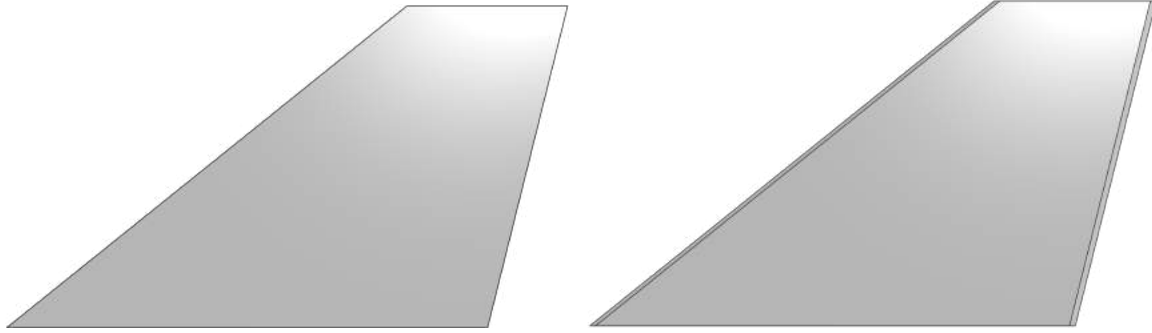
Trapezoidal Fins. LEFT: Rectangular cross section (RT). RIGHT: Diamond cross section (DT).
